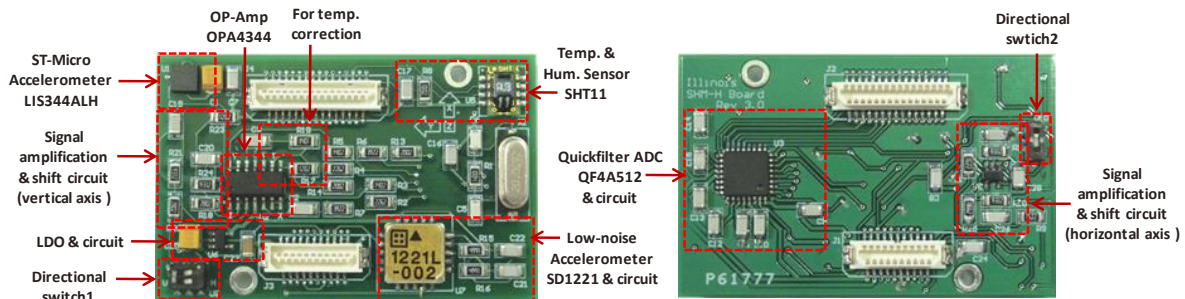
Top view (left) and bottom view (right) of SHM-H sensor board (Rev.3).
